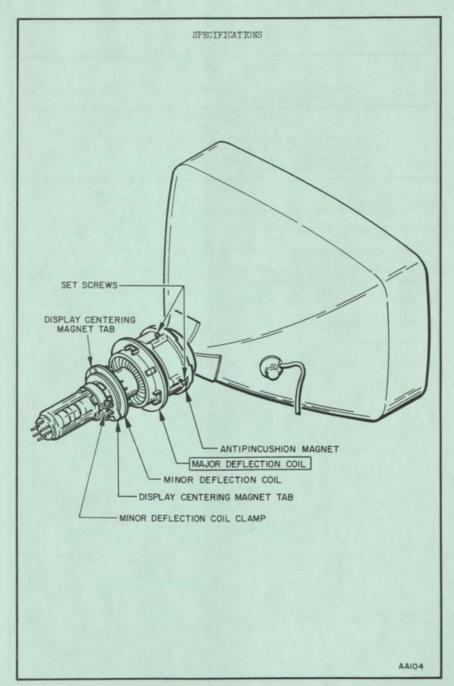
Major Deflection Coil Adjustment (Sheet 2)
